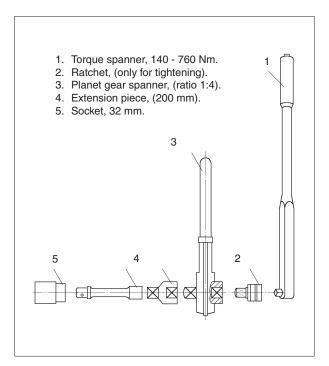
Tools combination for tightening of upper screws with planet gear.
